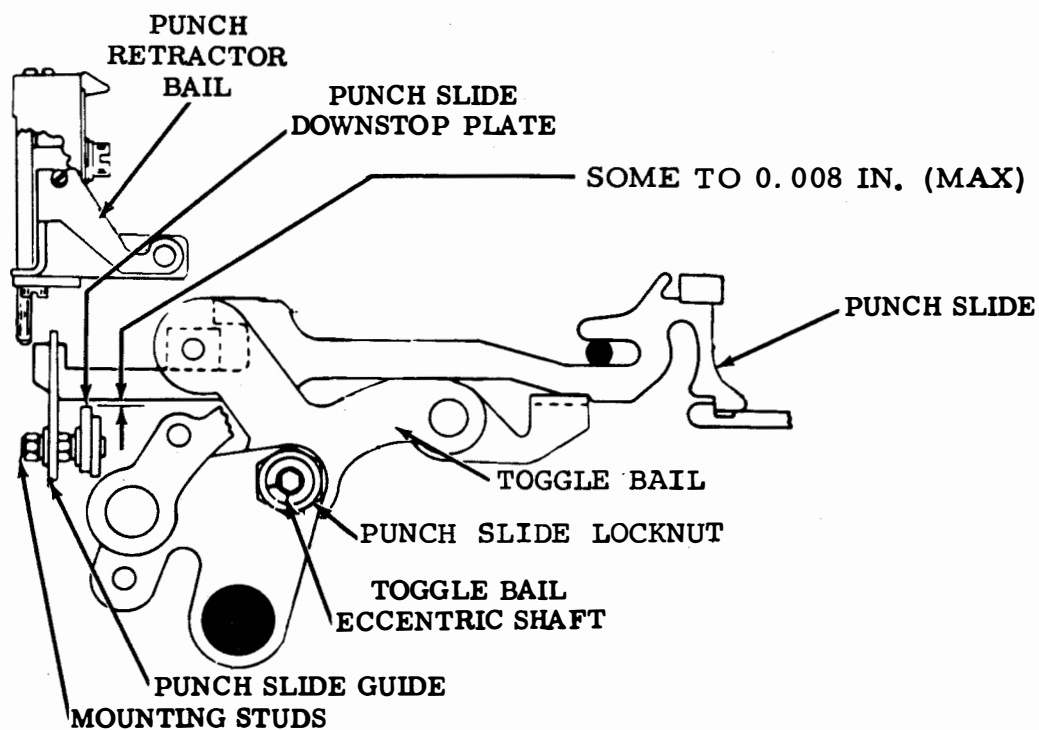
Punch Slide Downstop Position (Chadless Tape Mechanism)
